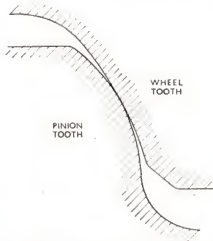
Mismatch between pinion and wheel tooth profiles. This permits the depth of tooth engagement to be varied slightly, so allowing for manufacturing tolerances.
